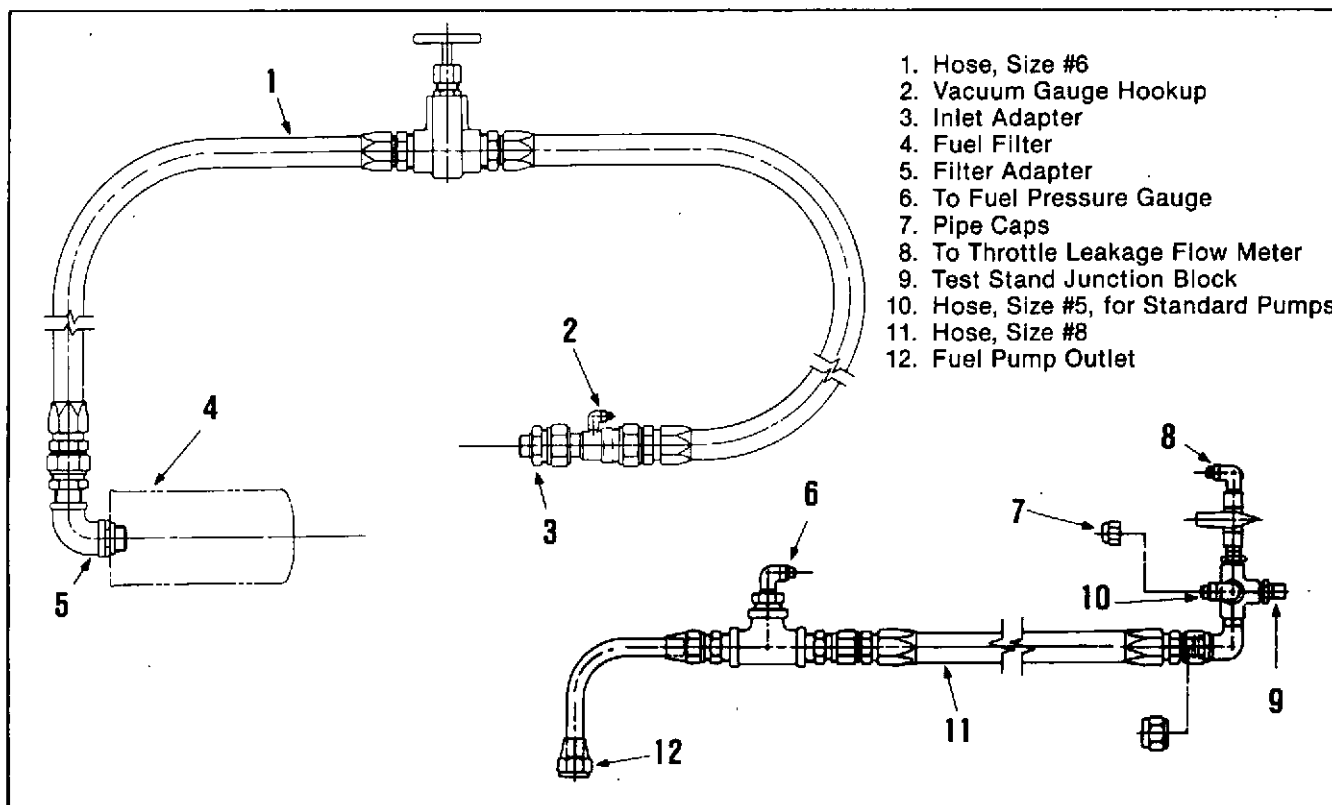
The conversion kit for the ST-848 test stand is 3375793.
